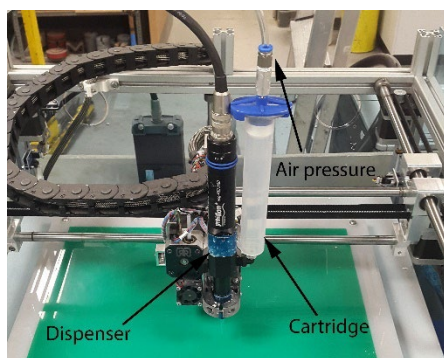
3D printing setup with dispensing unit mounted on axis and air pressurized feed cartridge.
